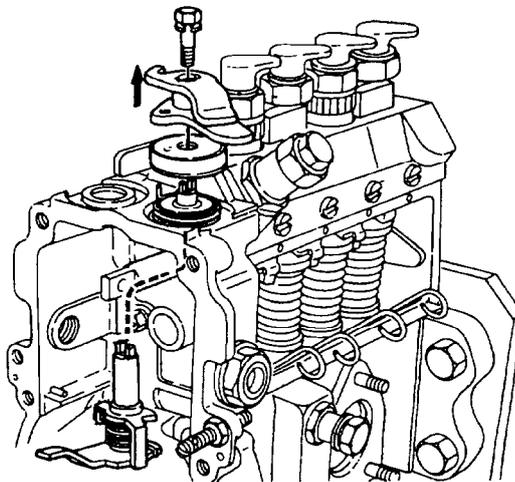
Full-load Setting Lever Retaining Nut Removal
